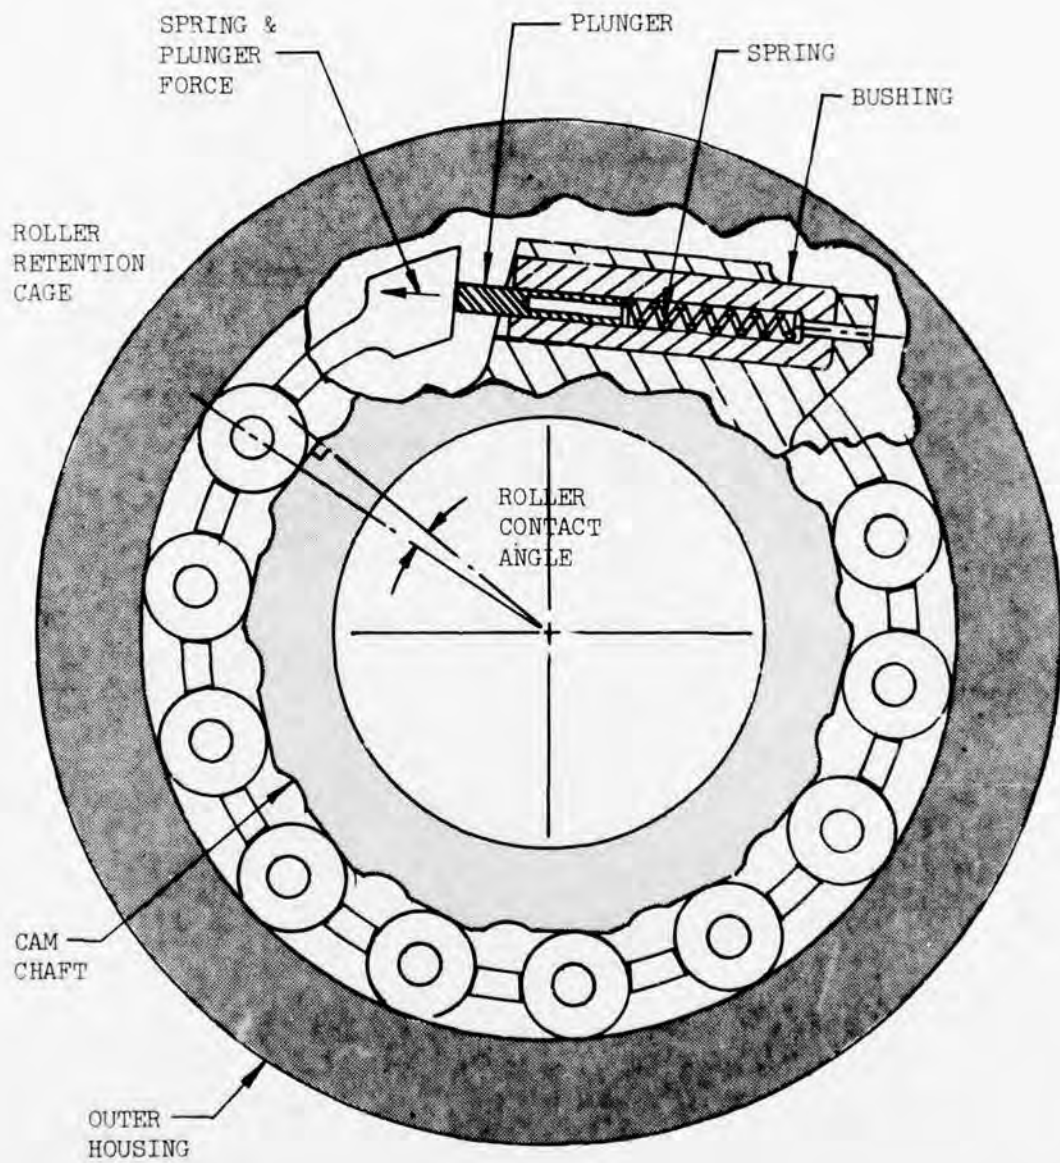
Cross Section of Ramp-Roller Overrunning Clutch.
